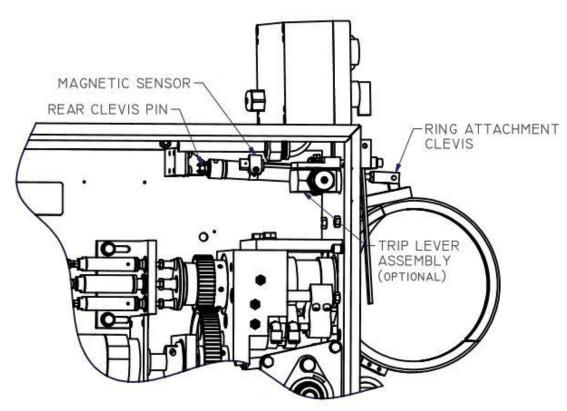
Feed Ring Cylinder Assembly Diagram
